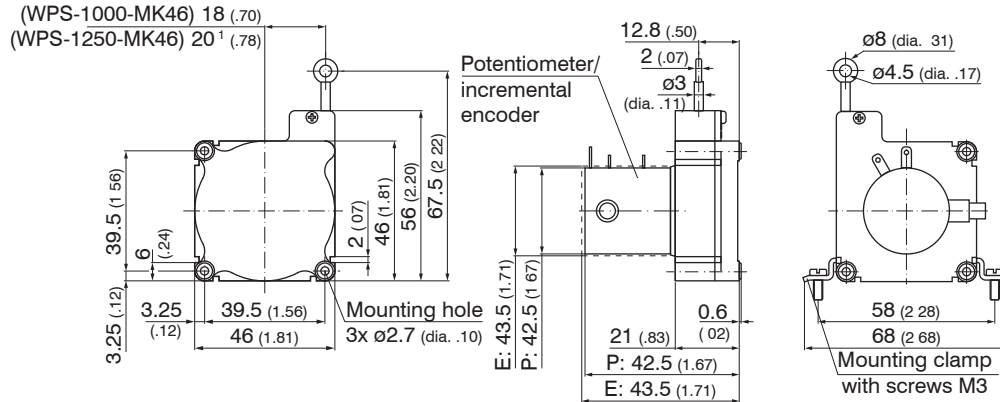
Dimensional drawing WPS- ... -MK46, with potentiometer or encoder, dimensions in mm (inches), not to scale
